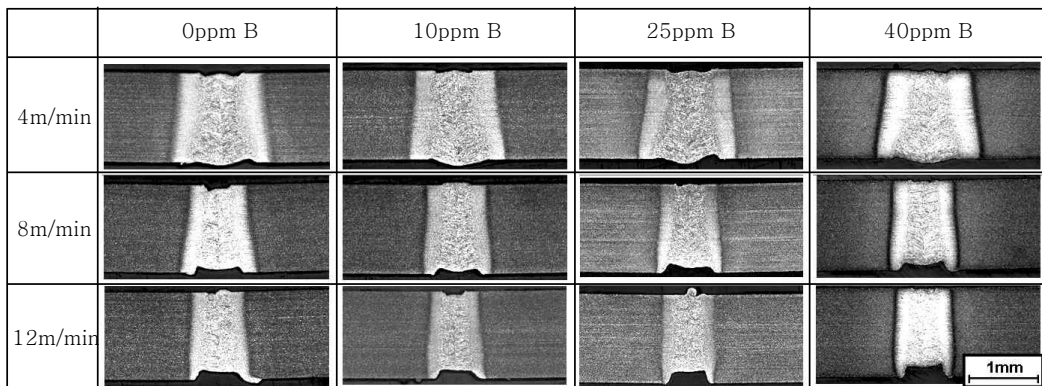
Cross-section of bead in laser welded with various welding speed (m/min) and B contents (ppm) at the laser power (kW) of 3.5 kW
